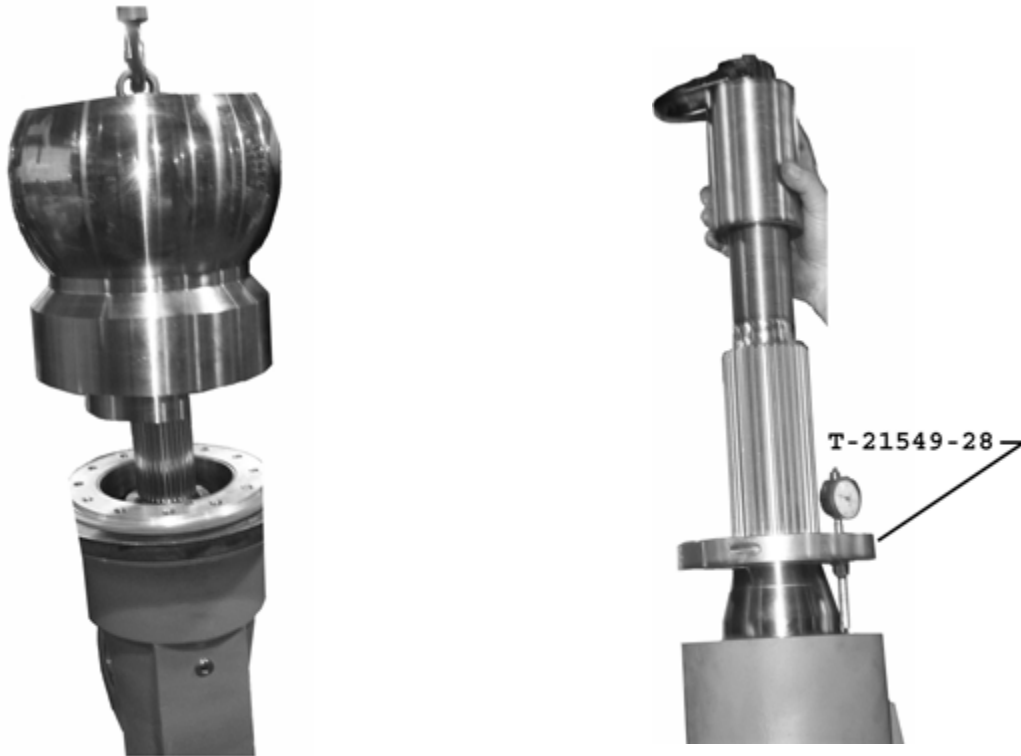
Lower Ball, Secure with Four Capscrews (left), and Turn Over and Install [Dial Indicator T-21549-28](#) (right)
